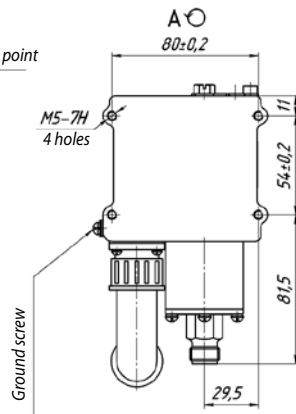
Overall and mounting dimensions of the device with EN 175301-803 form A connector
